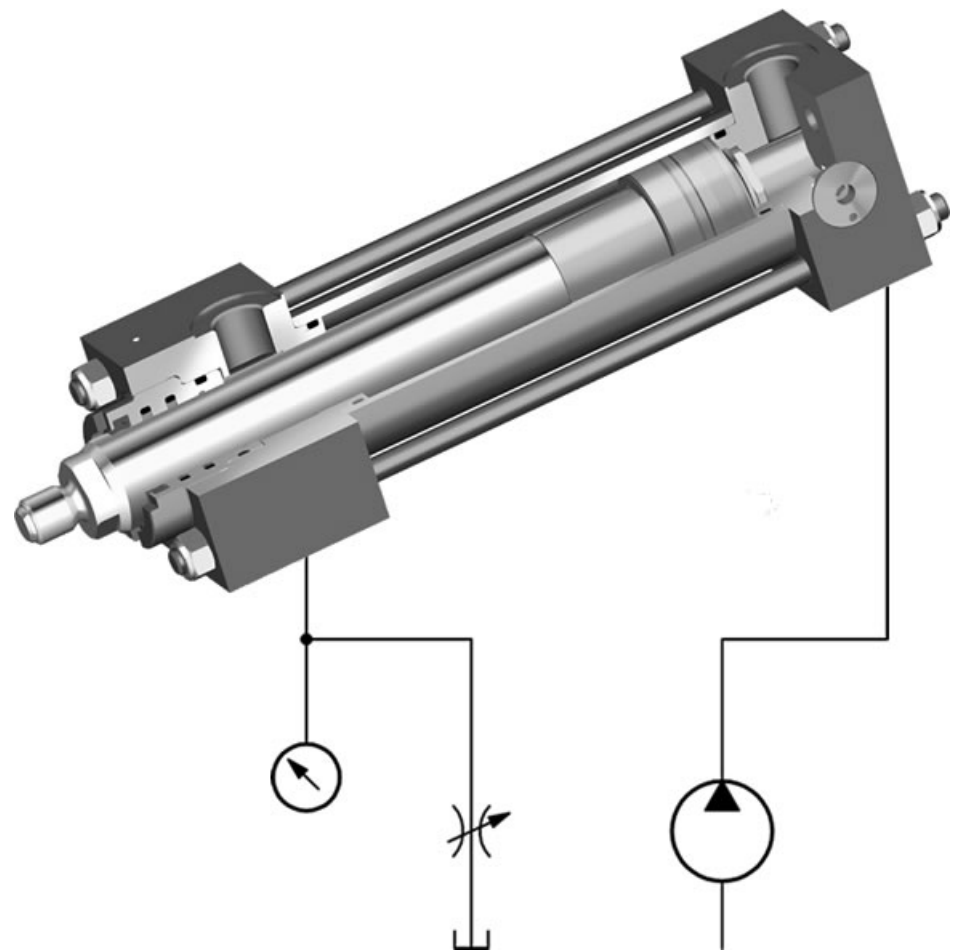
Practical example: Hydraulic cylinder of tie rod design
